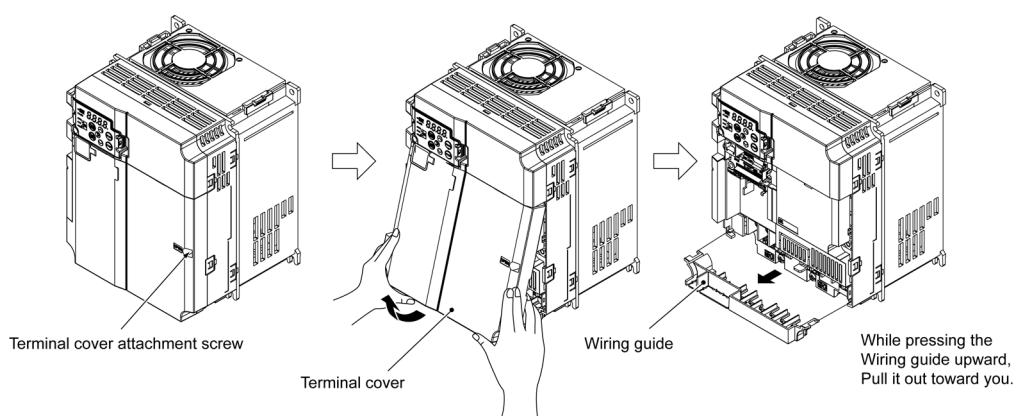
Removal of the Terminal Cover and the Wiring Guide (for FRN0069E2■-2□)
